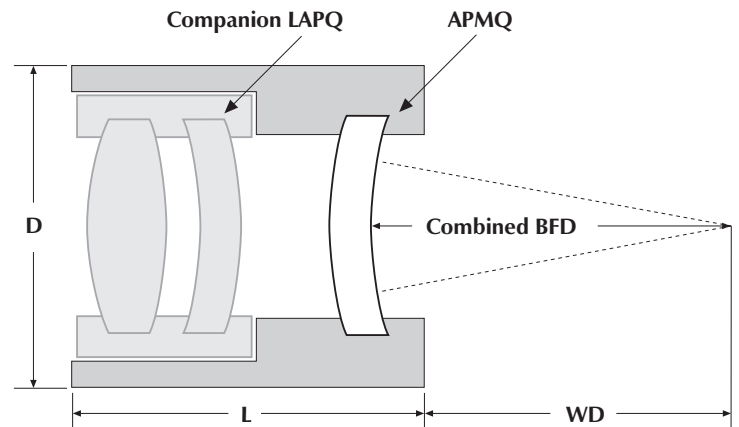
Schematic depicting an APMQ housing integrated with a LAPQ aplanat doublet assembly.
